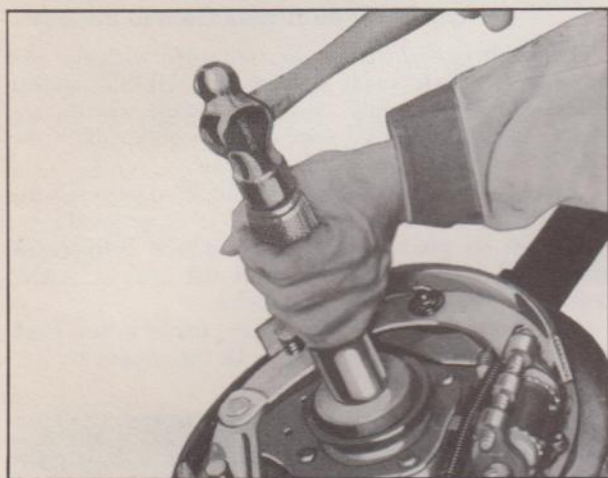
Axle Shaft Bearing and Retainer Replacer
